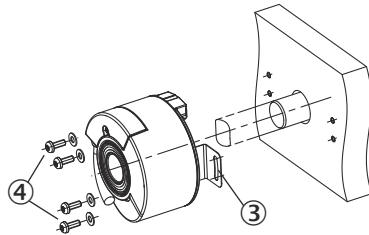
Installation through hollow shaft encoder with metal hollow shaft clamping and stator coupling
